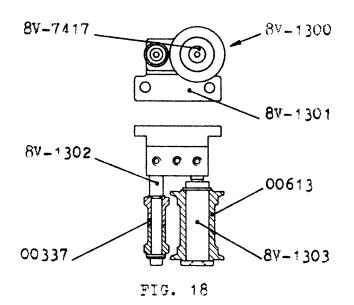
35mm UPPER GUIDE ROLLERS (from serial No.84501)
